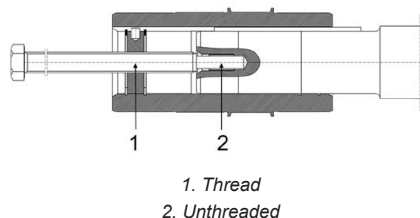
Removing a shaft-mounted gearbox from the driven shaft with a key
